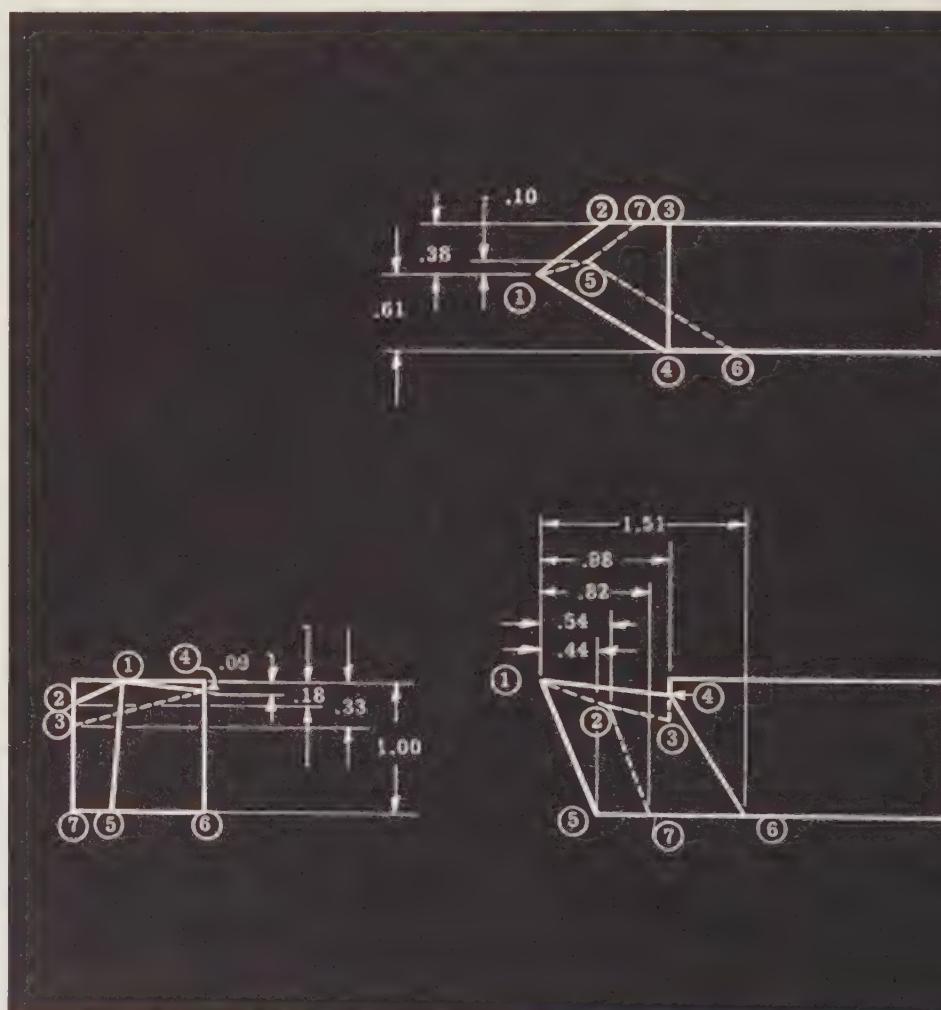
This is a three-view product drawing of a single point cutting tool model. A fixture is to be designed for grinding a tool bit blank so that the cutting surfaces will match those of the model. The encircled numbers identify the plane surfaces of the tool bit.
